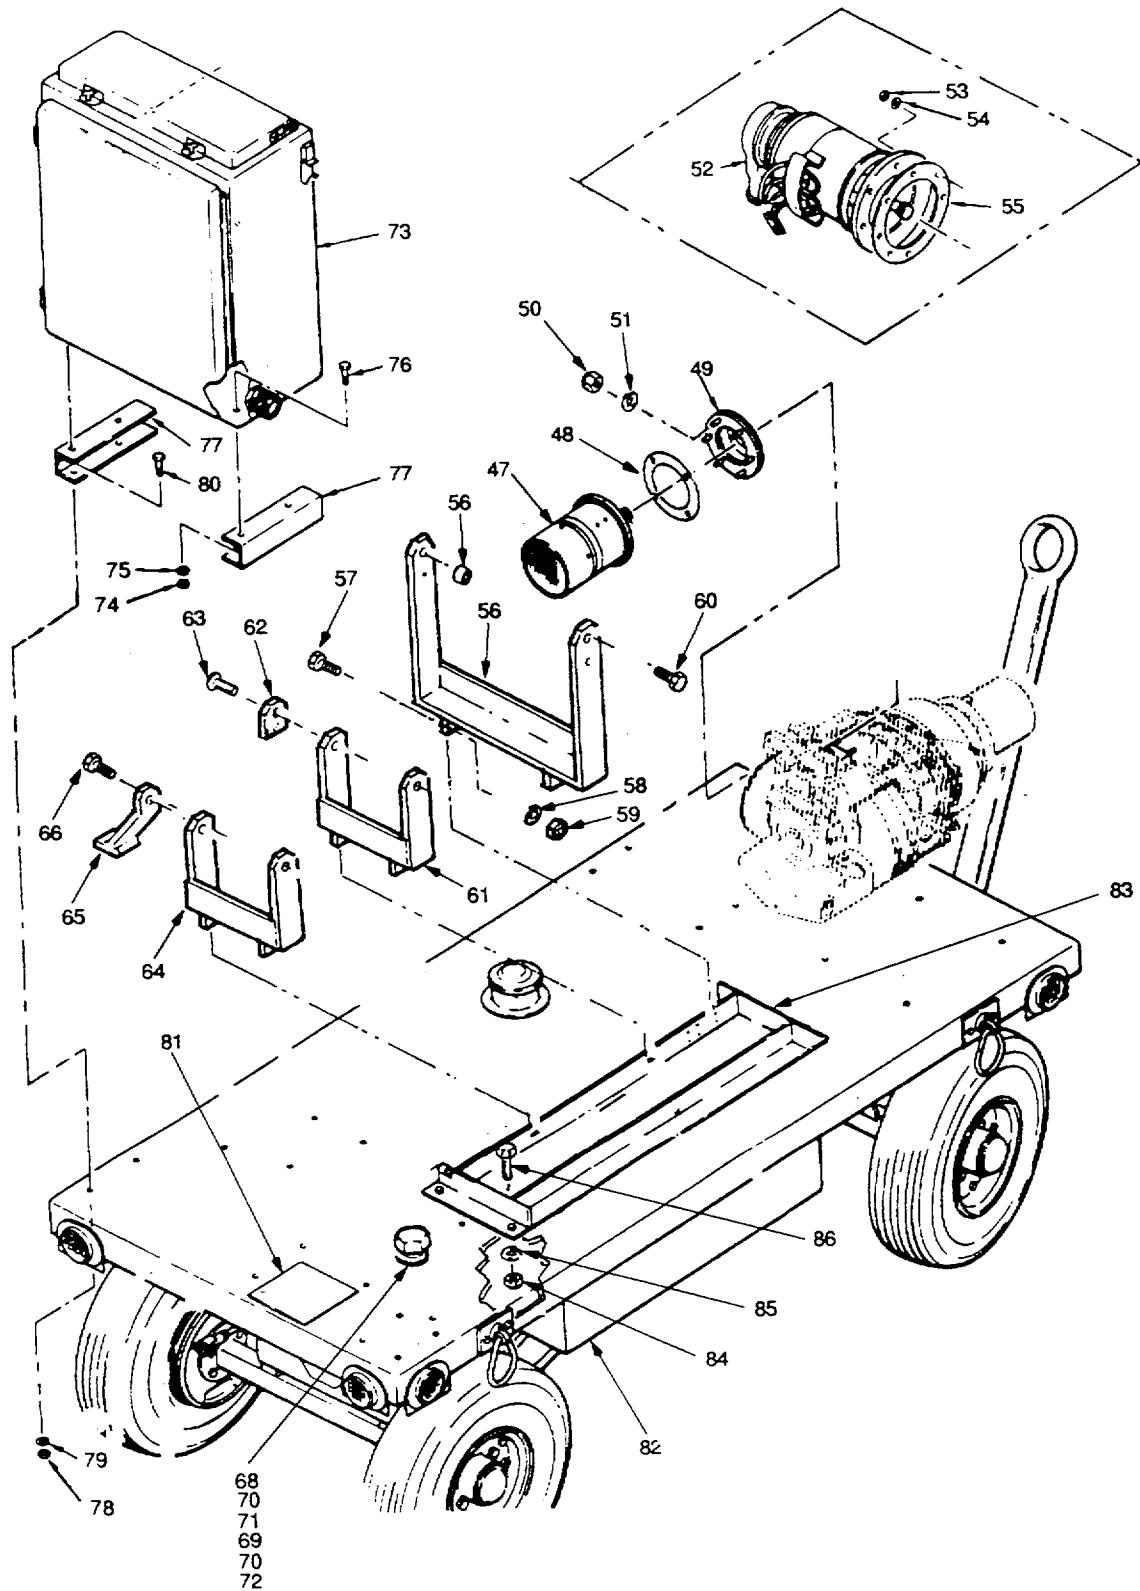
Mobile Check and Adjustment Stand (Sheet 3 of 3).
